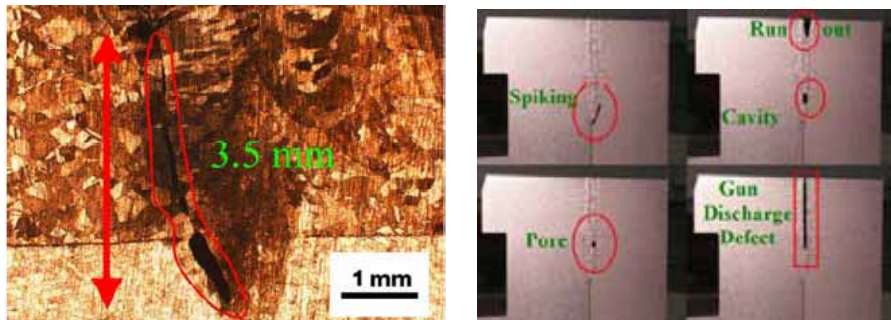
A root defect in copper EB-weld (left) and different defect types in a EB-weld (right).
